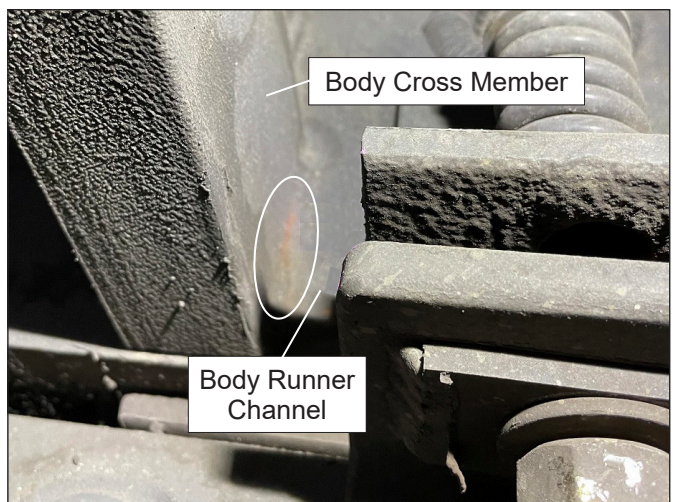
Example of Cracking in Body Cross Member Weld
